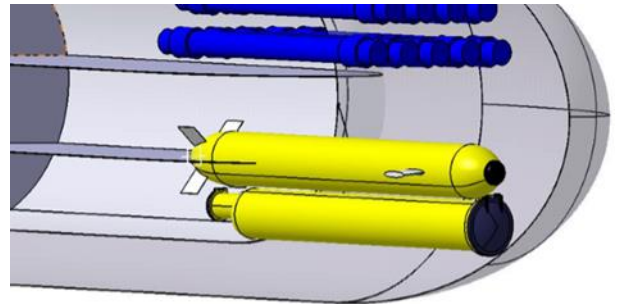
Comparison of dimensions of THESEUS with the bow horizontal large tube
